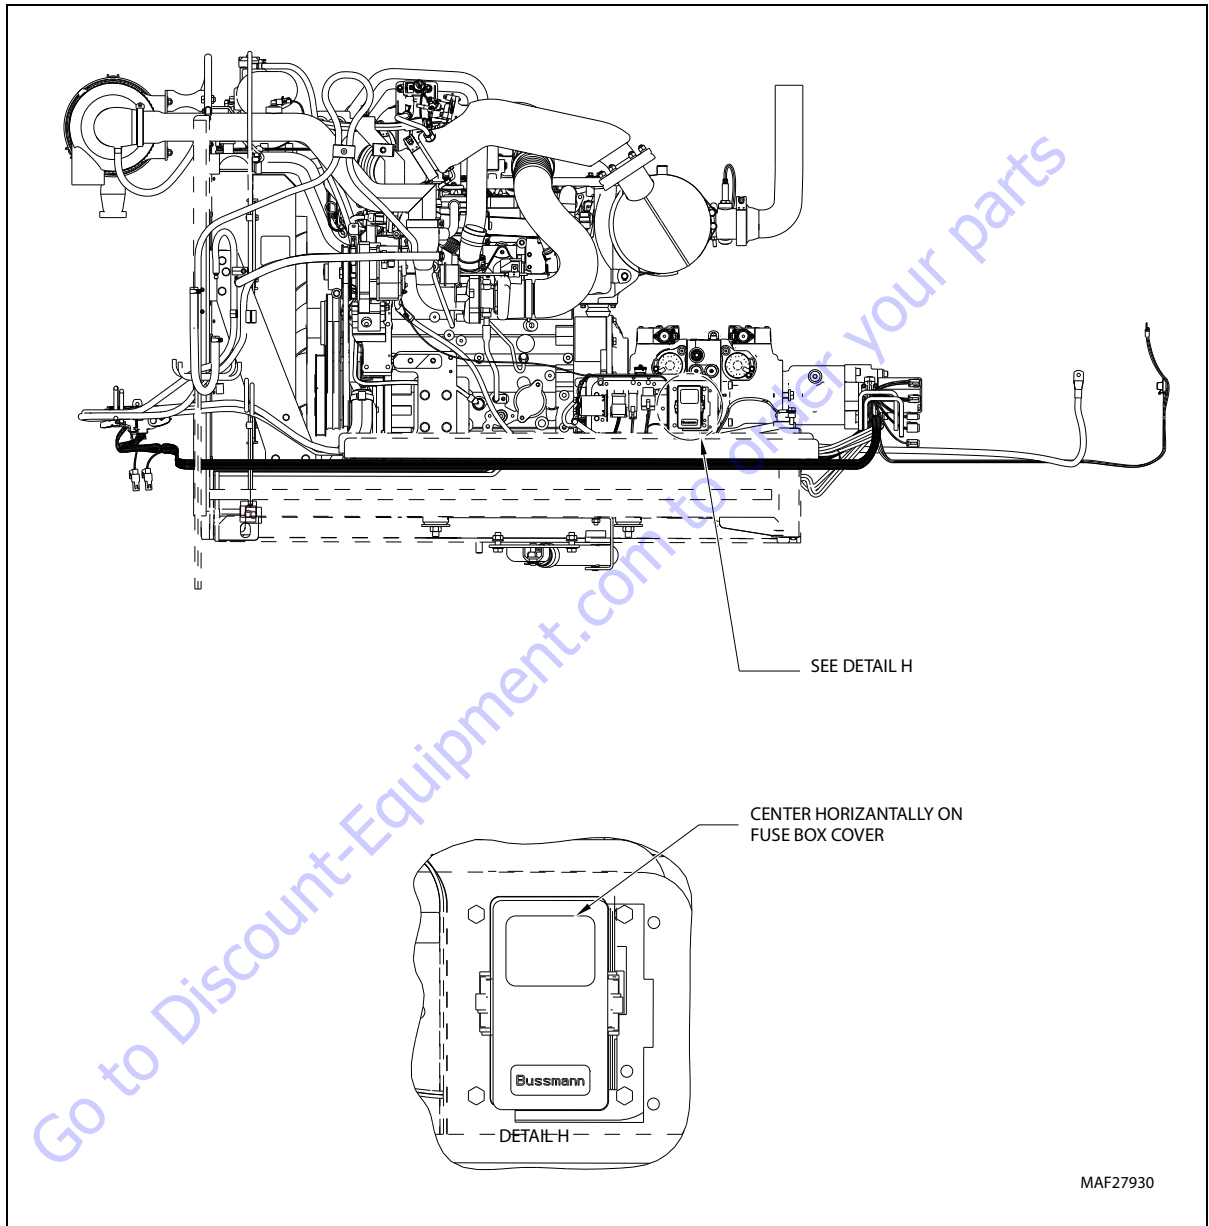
Engine Installation and Diesel Exhaust Fluid (DEF) System (T4F & Stage IV) - Sheet 6 of 6
